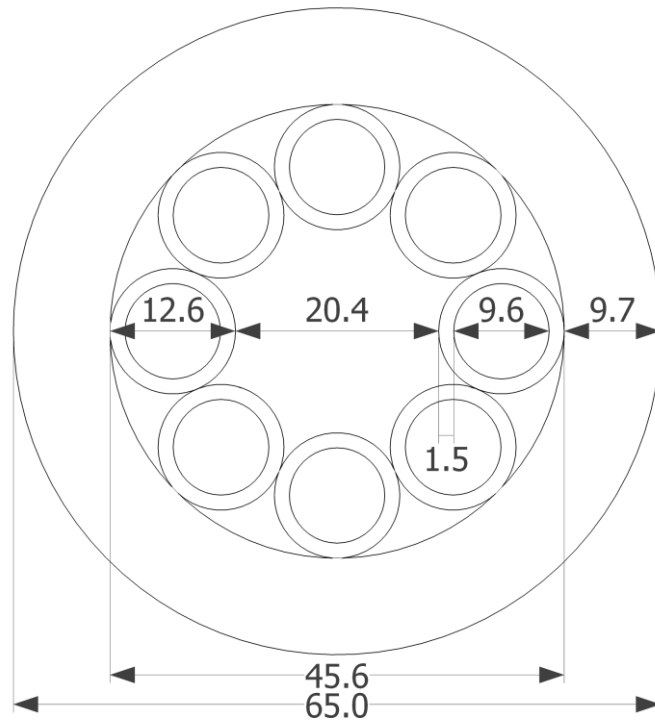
Cross-section view of the preform to 3D print. All dimensions in mm.
